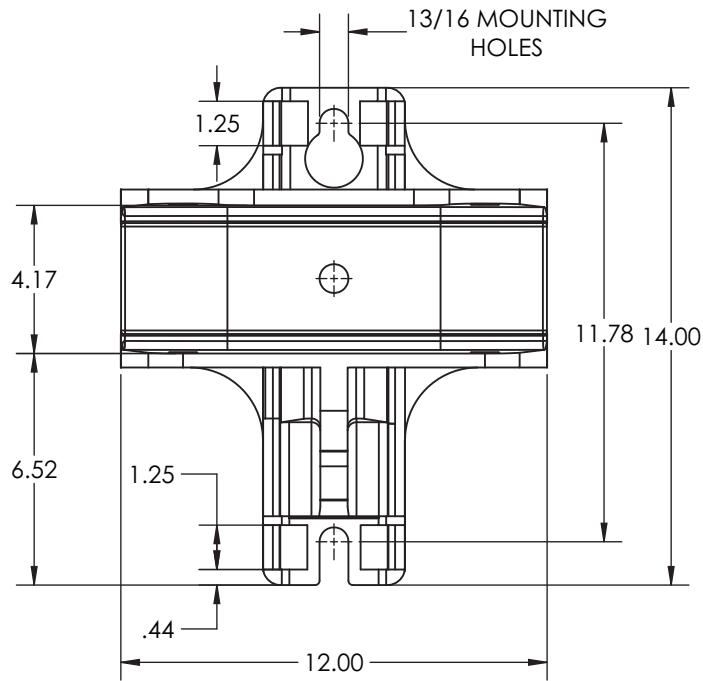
MacLean Dead-End Mounting Bracket Detail
